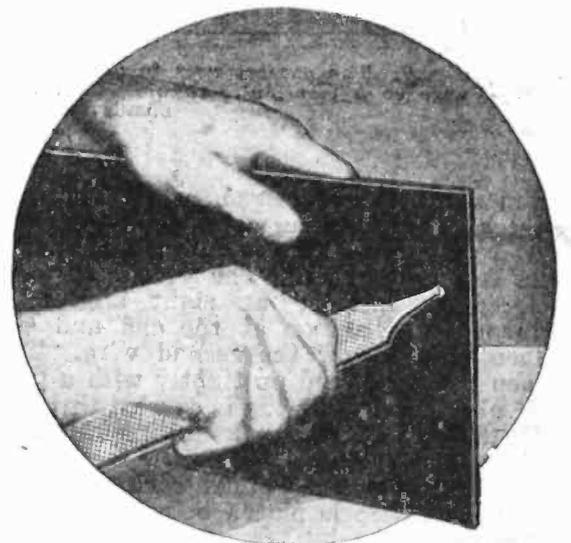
Holes in panels can be enlarged by using the end of the file as a reamer.
